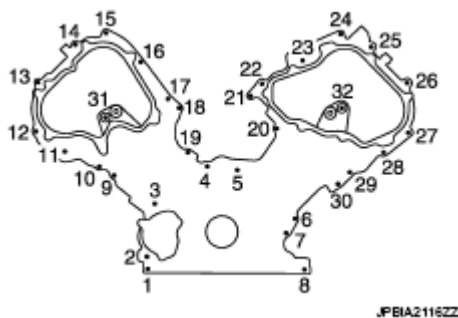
Identifying Timing Chain Mounting Bolt Loosening Sequence
